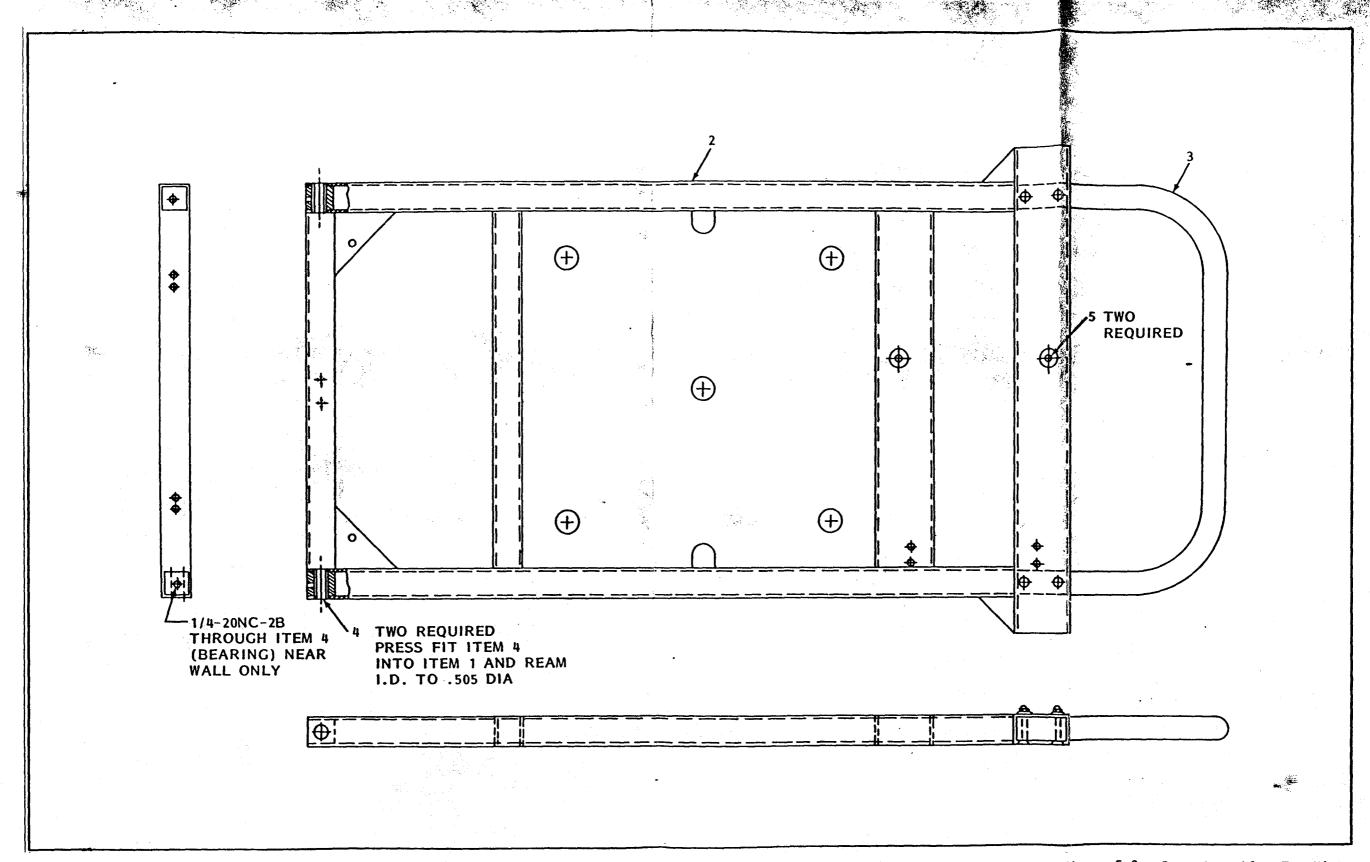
Base Assembly, Top View, Location of Components (Sheet 3 of 5)
